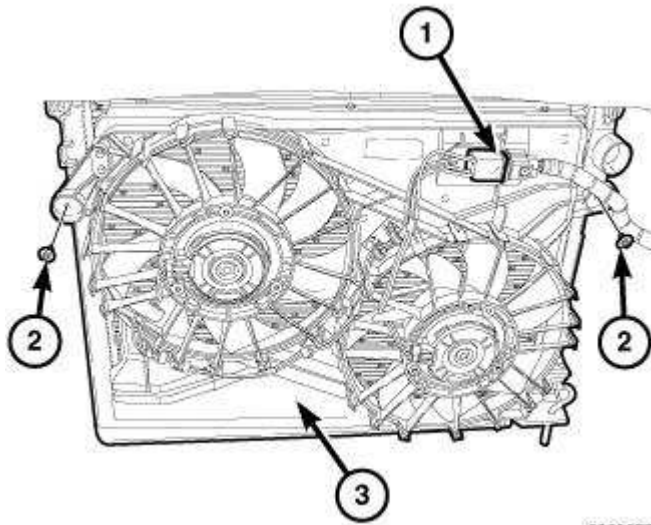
Cooling Fan Electrical Connector, Cooling Fan Mounting Bolts & Radiator
